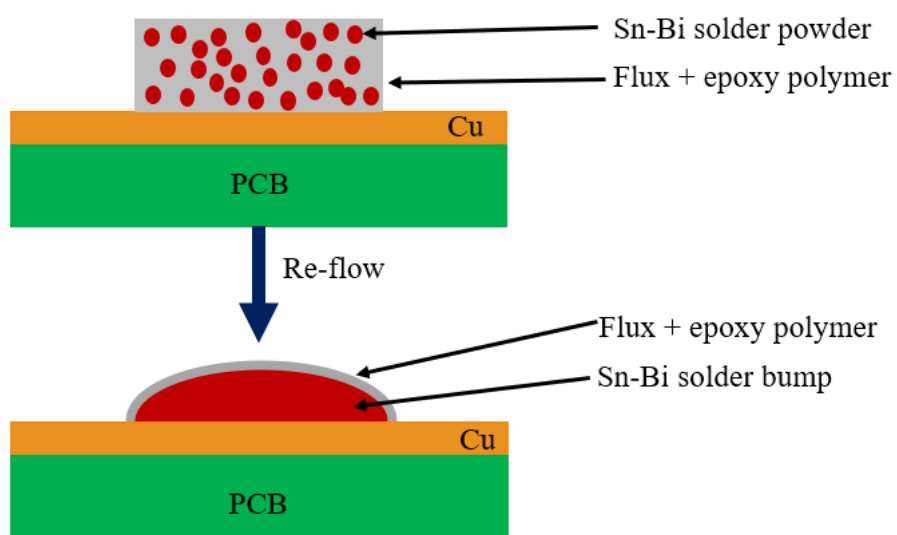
Schematic of Sn-Bi epoxy solder after soldering
